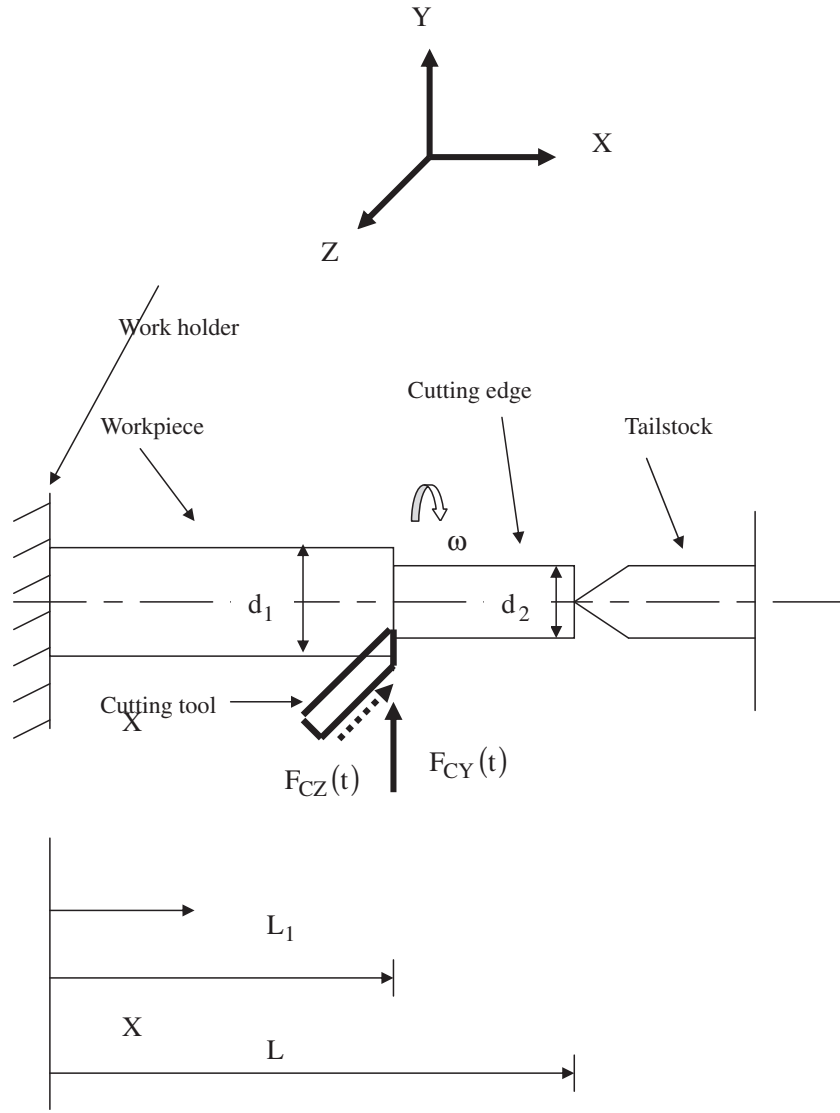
Cutting edge-workpiece system with the cutting forces in the lathe machine.
